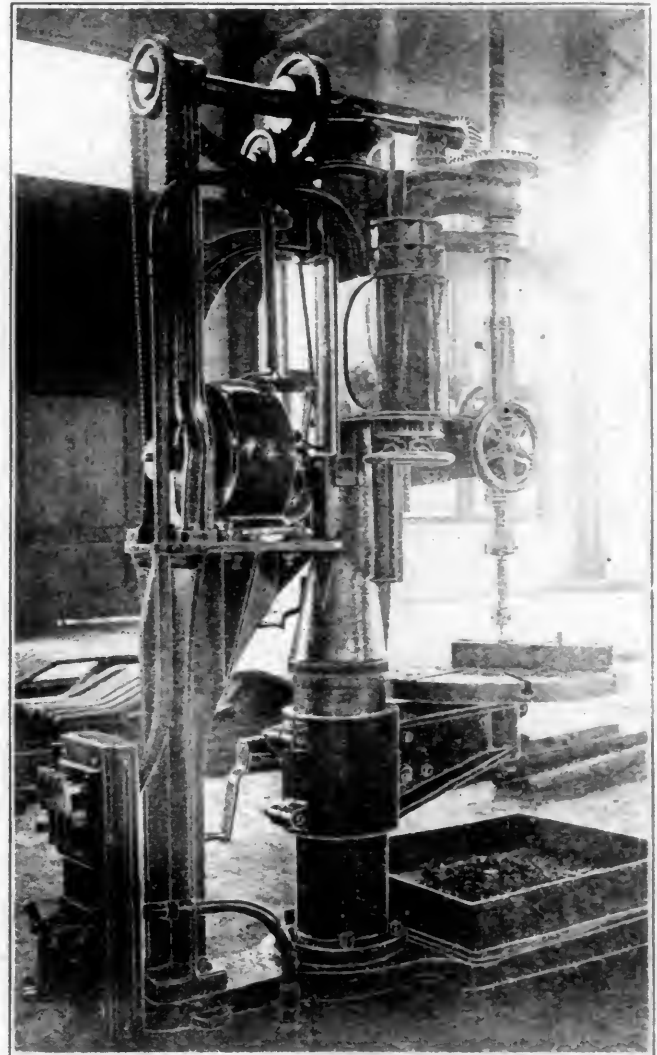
APPEARANCE OF THE DRILL AFTER BEING EQUIPPED WITH THE CROCKER-WHEELER MULTIPLE-VOLTAGE DRIVE.
